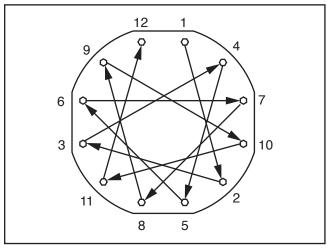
Alternating star pattern for tightening components assembled with a gasket.
